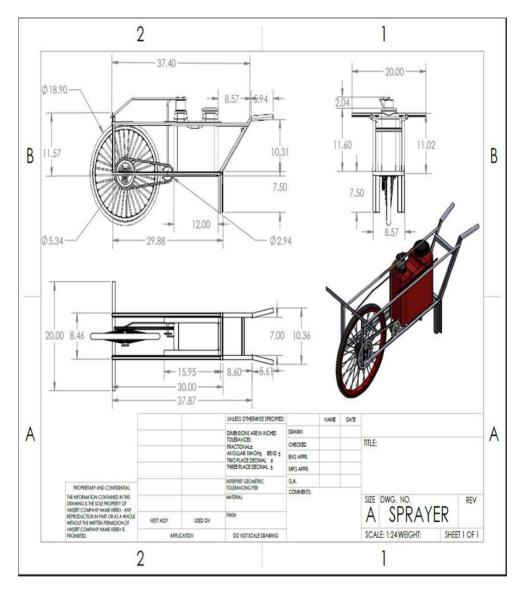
Schematic view of 2D and 3D design of a sprayer machine
